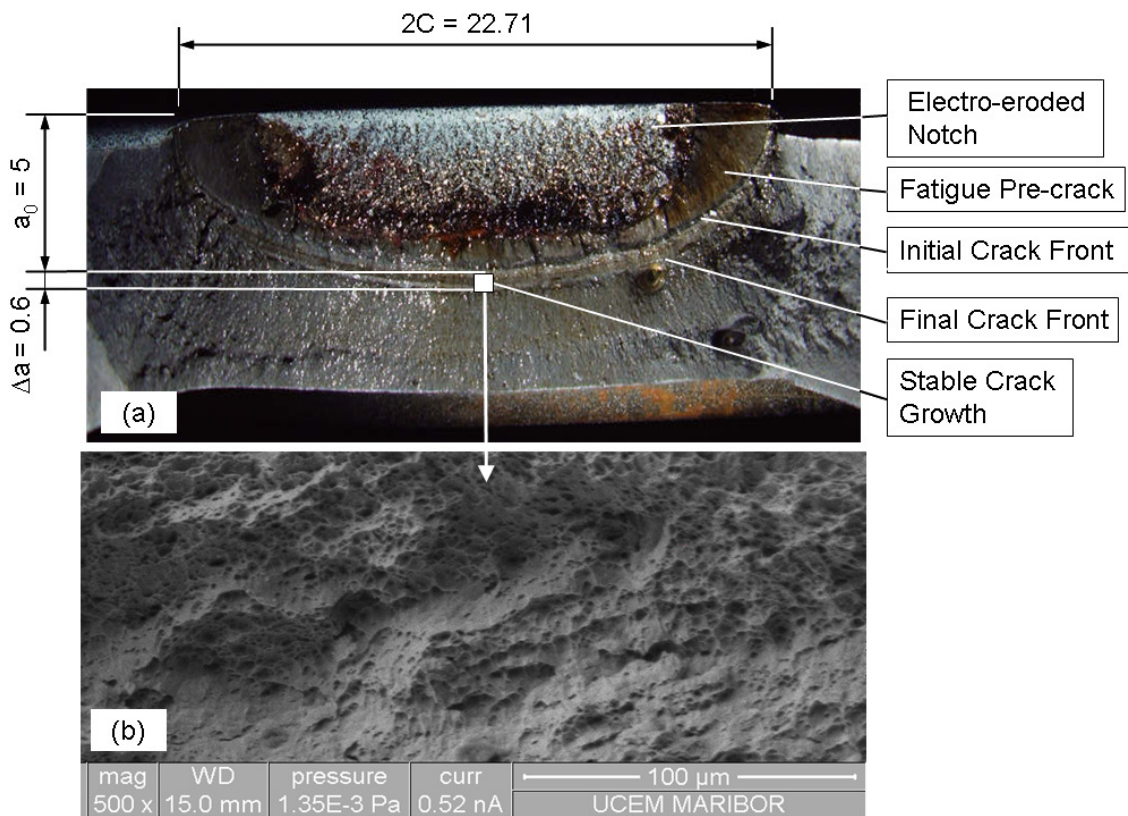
(a) fracture surface of tensile panel with semi-elliptical surface crack in WM and (b) magnified region on stable crack growth surface.
